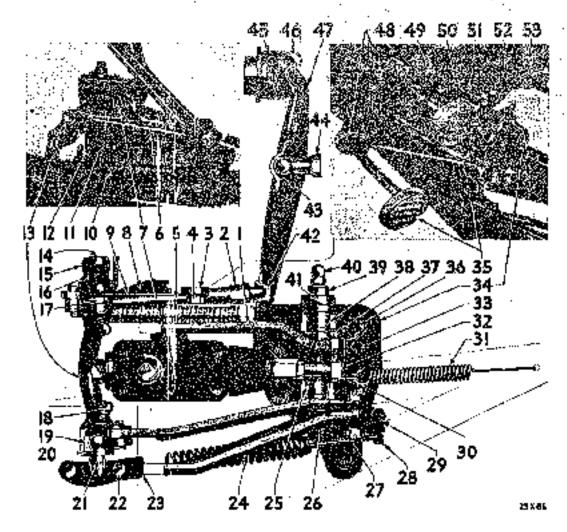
Clutch and Brake Pedal Linkage (1939-4) Models)
